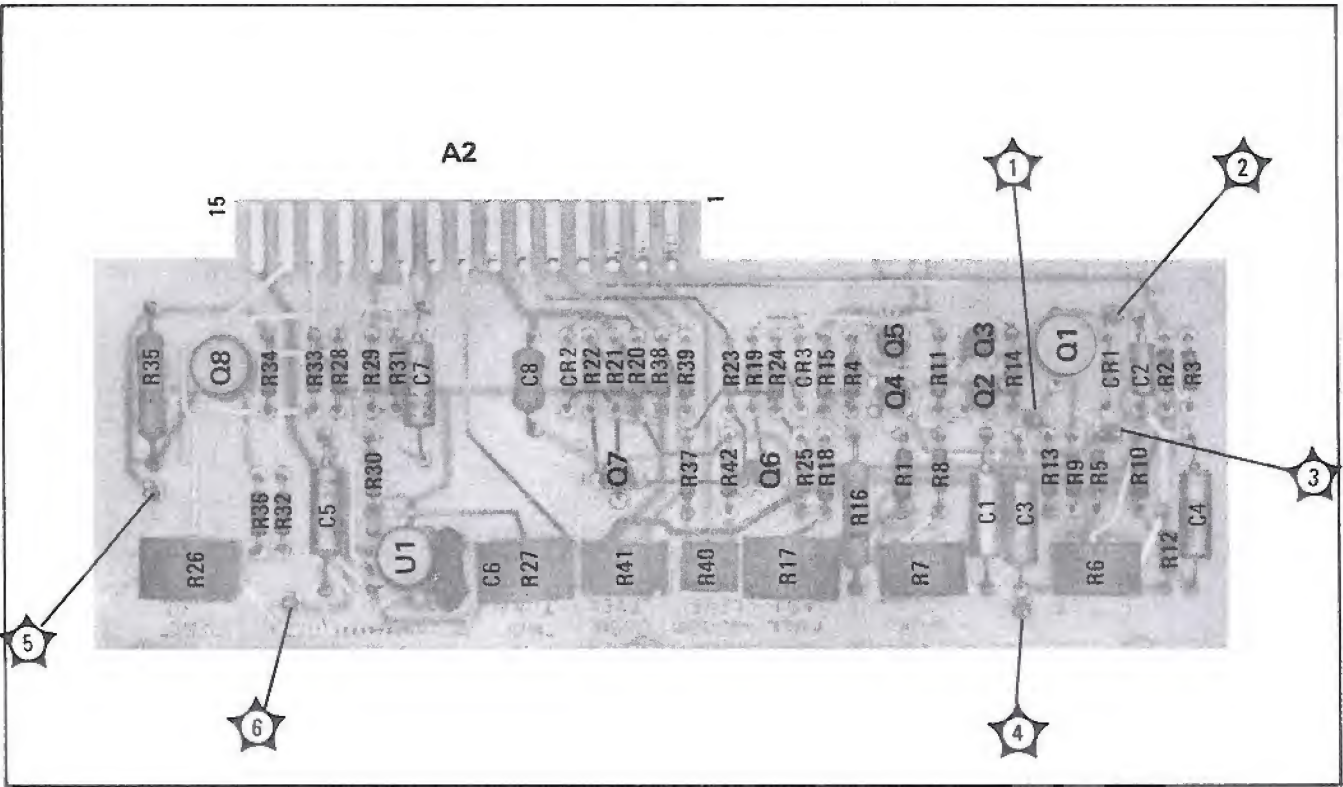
Modulator/Oscillator Driver Assy A2 Component Locations
